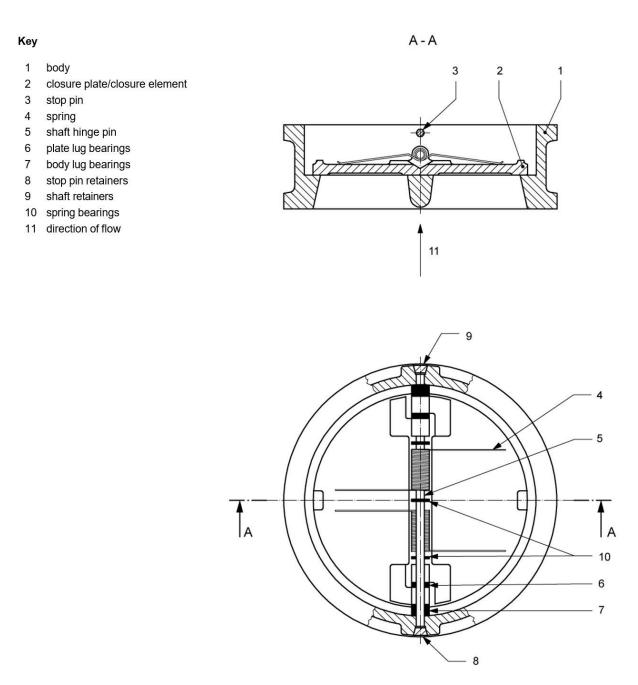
Check Valve (Long Pattern, Typical Dual-plate Wafer-type)
